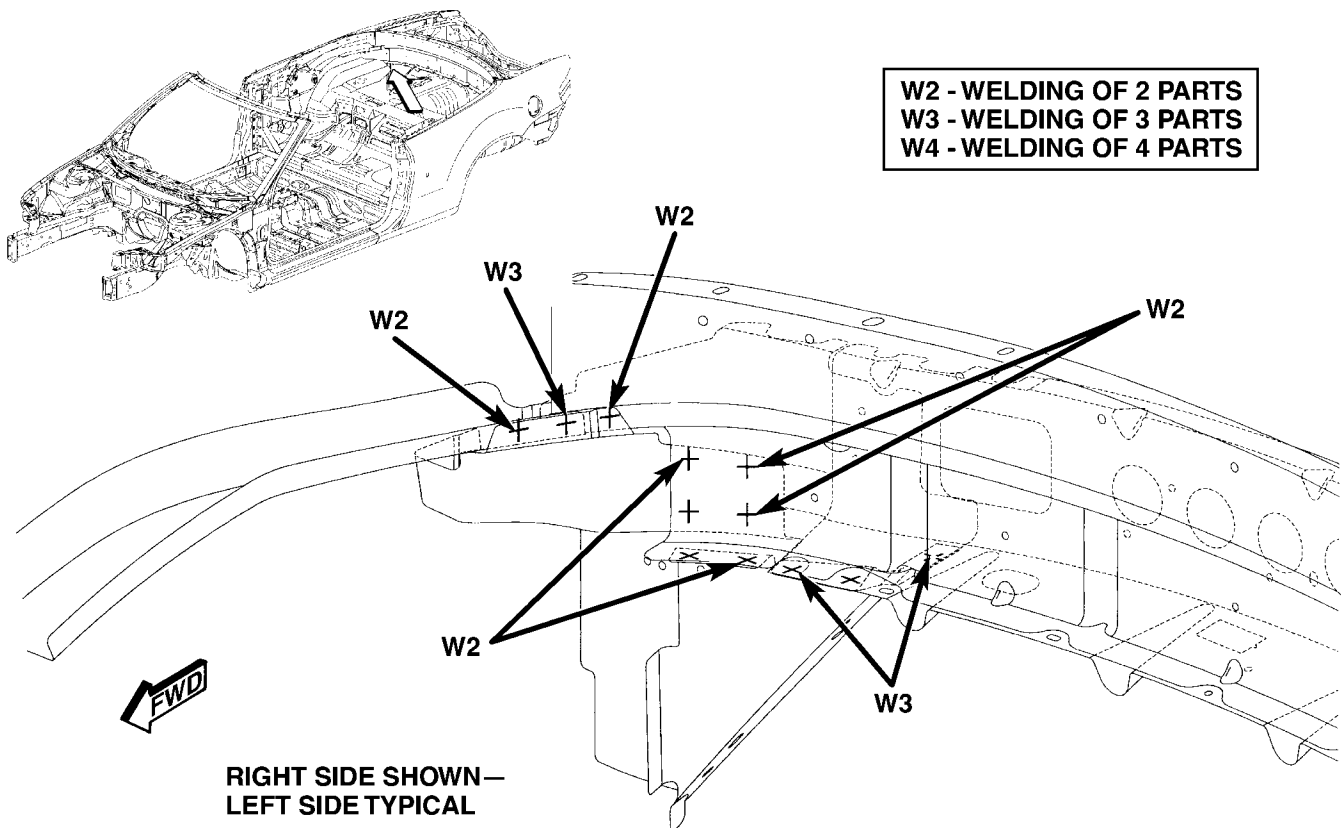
UPPER DECK TROUGH PANEL TO UPPER DECK PANEL FRONT REINFORCEMENT TO DECK PANEL REAR REINFORCEMENT
